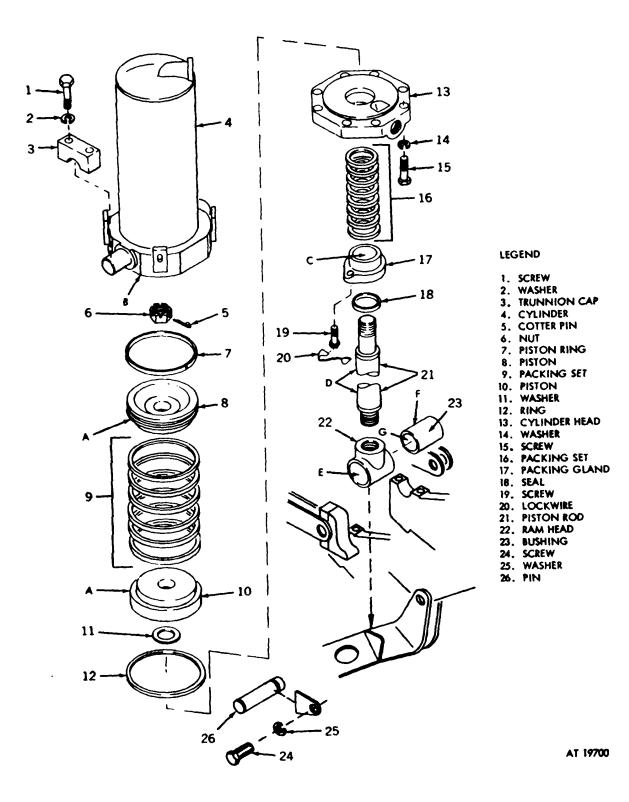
Disassembly or assembly of moldboard cylinder and ram.
